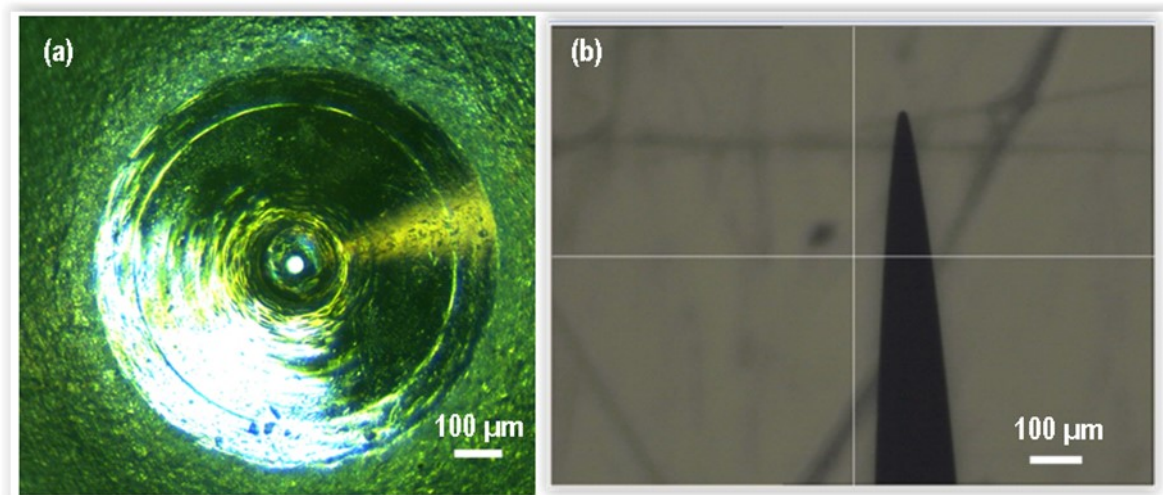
(a) Drilled pre-indented gasket (25 mm thick), the hole (35 mm diameter) was drilled using a conical tungsten drill. (b) Tungsten conical drill used after drilling (20 mm tip).
